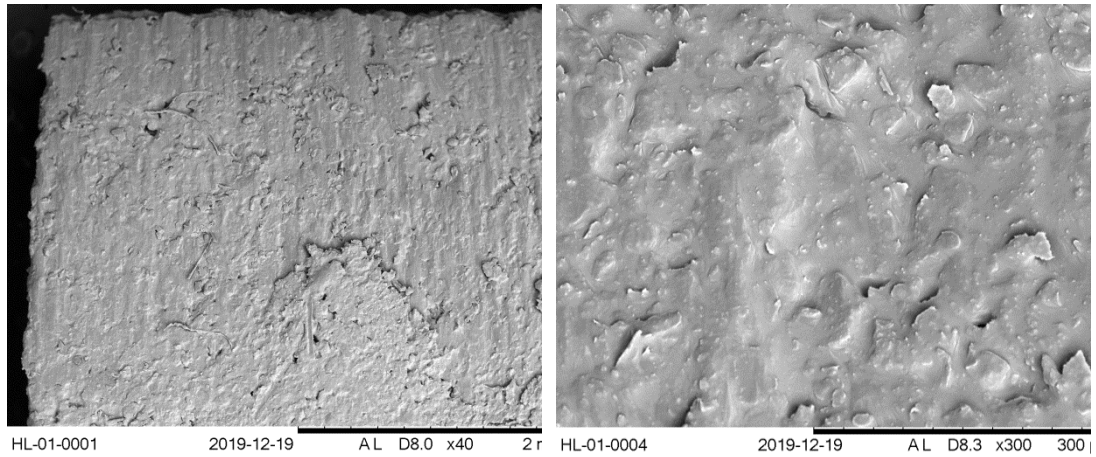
EOS PEEK HP3 gear tooth lubricated, Test 6.
